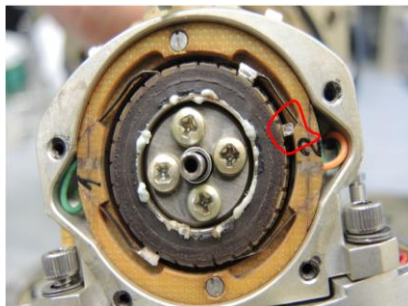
Disconnected brush in an assembled Motor with brush-ring.
